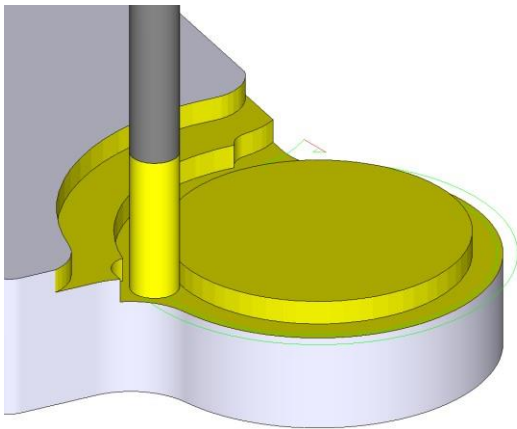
The bottom of the cutter is positioned on open edges to always produce a clean finish.
